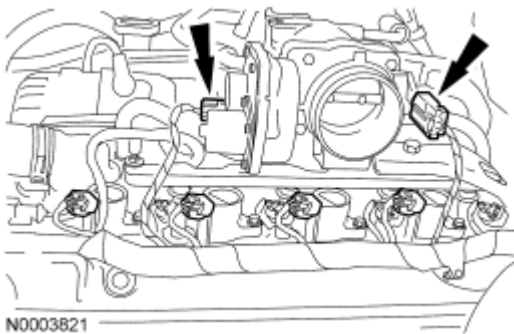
Locating Throttle Control And Throttle Position (TP) Sensor Electrical Connectors
